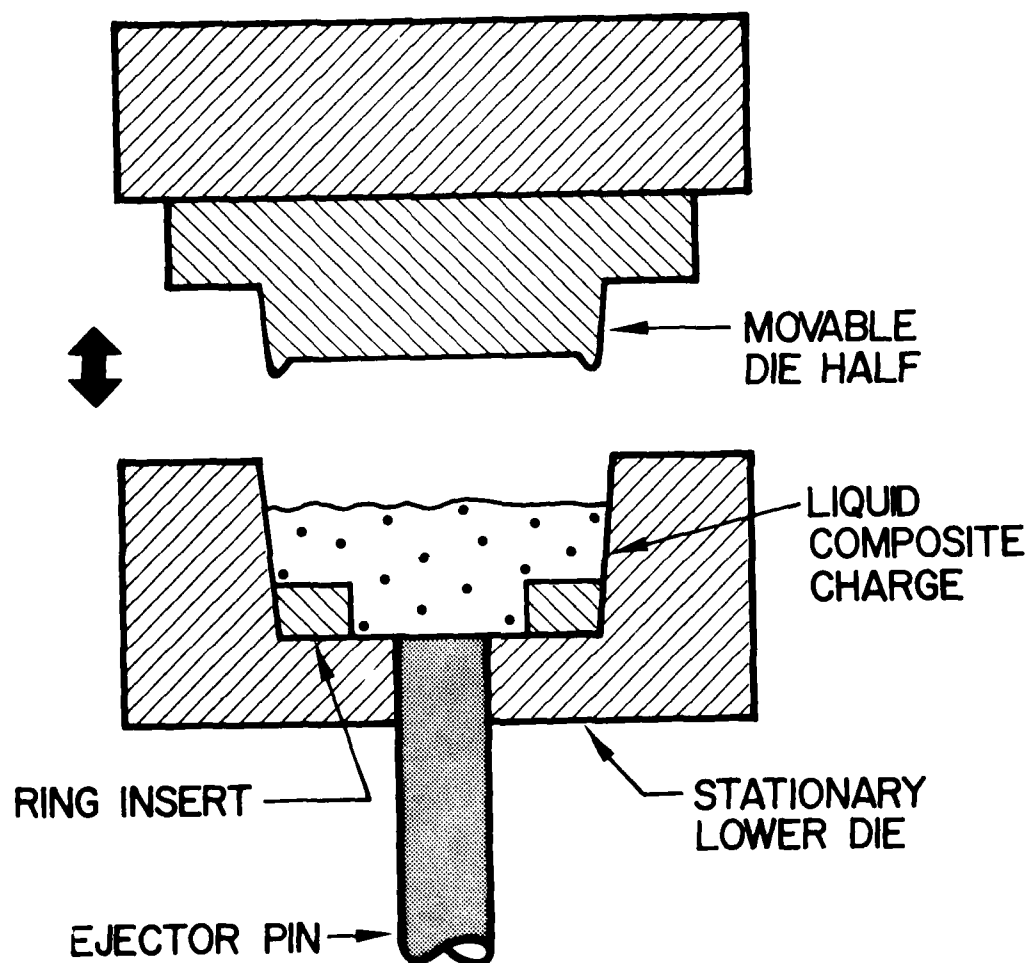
Schematic illustration of the forging dies used in forming of the aluminum matrix composites in the hydraulic press.
